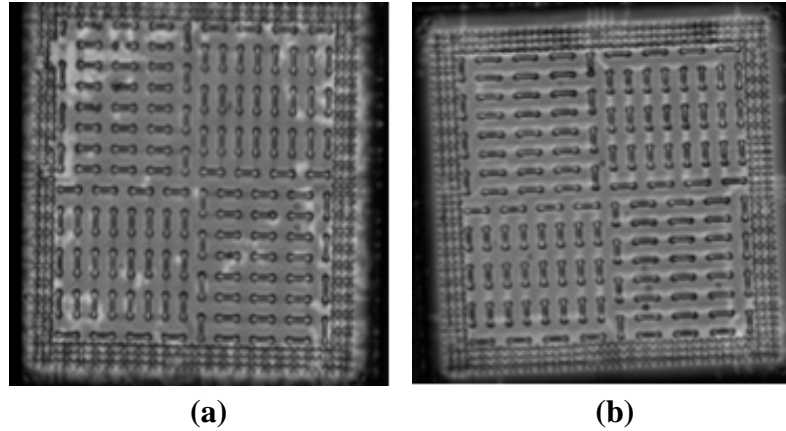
C-SAM image of BT assembly (a) without NCF dry-up process and (b) with NCF dry-up process and IPA cleaning
